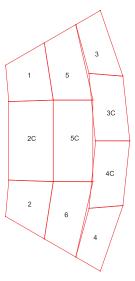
AutoCAD drawing of mirror assembly, made using CMM corner points.
